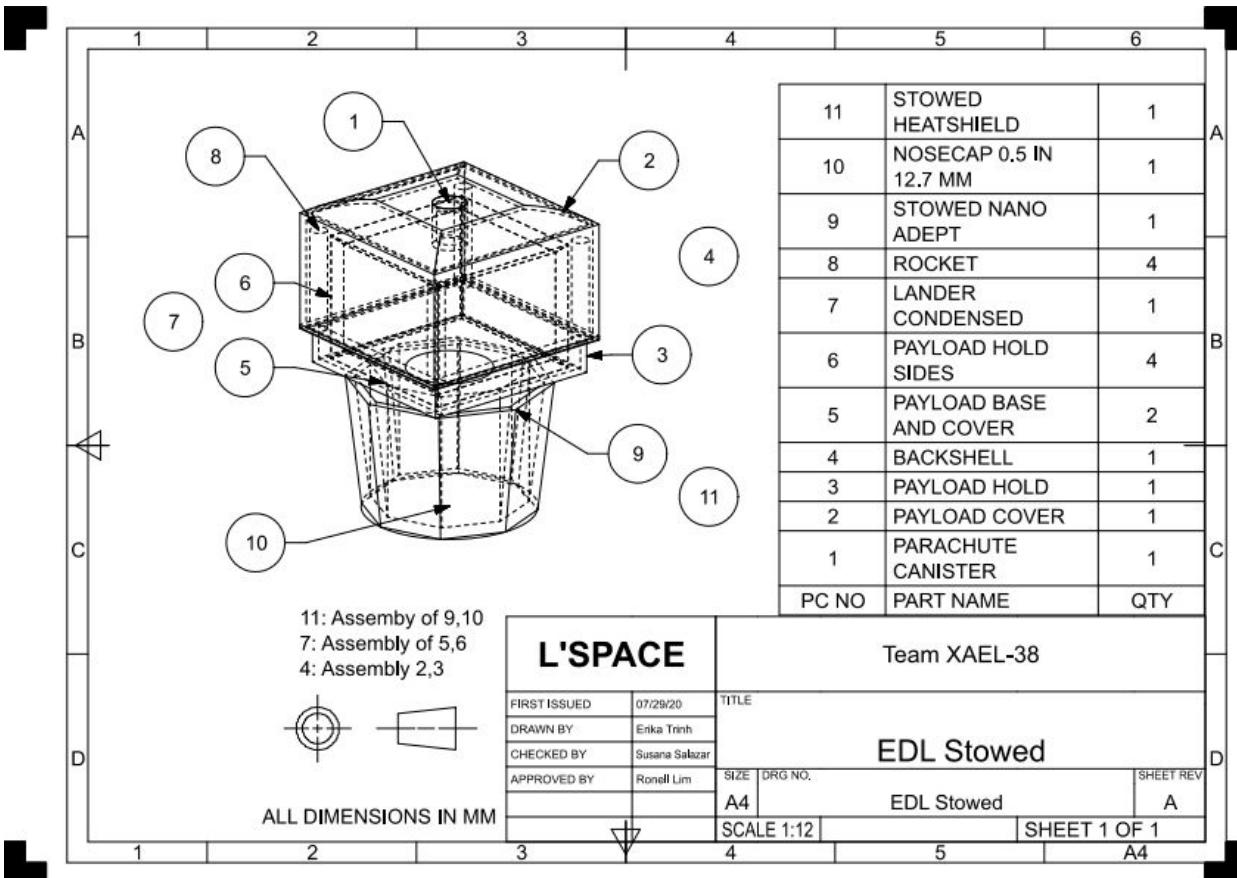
EDL Stowed Assembly Drawing, Trimetric View.
